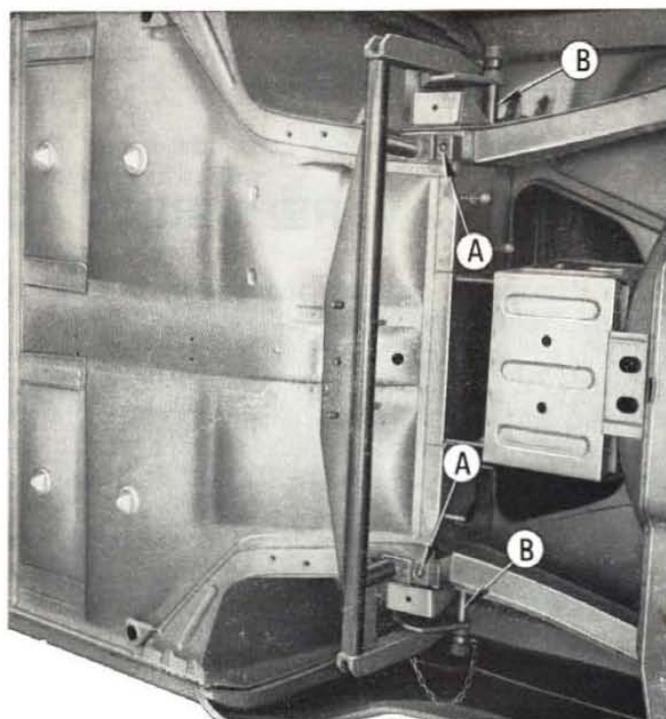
Detail showing use of gauge A. 74141 for checking underbody front.
